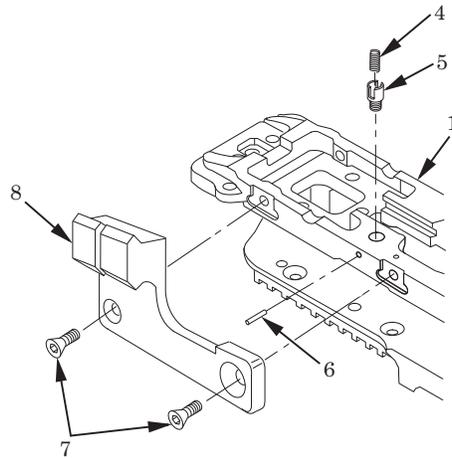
Installation of Day/Night Sight Mount and Stop Pin.
